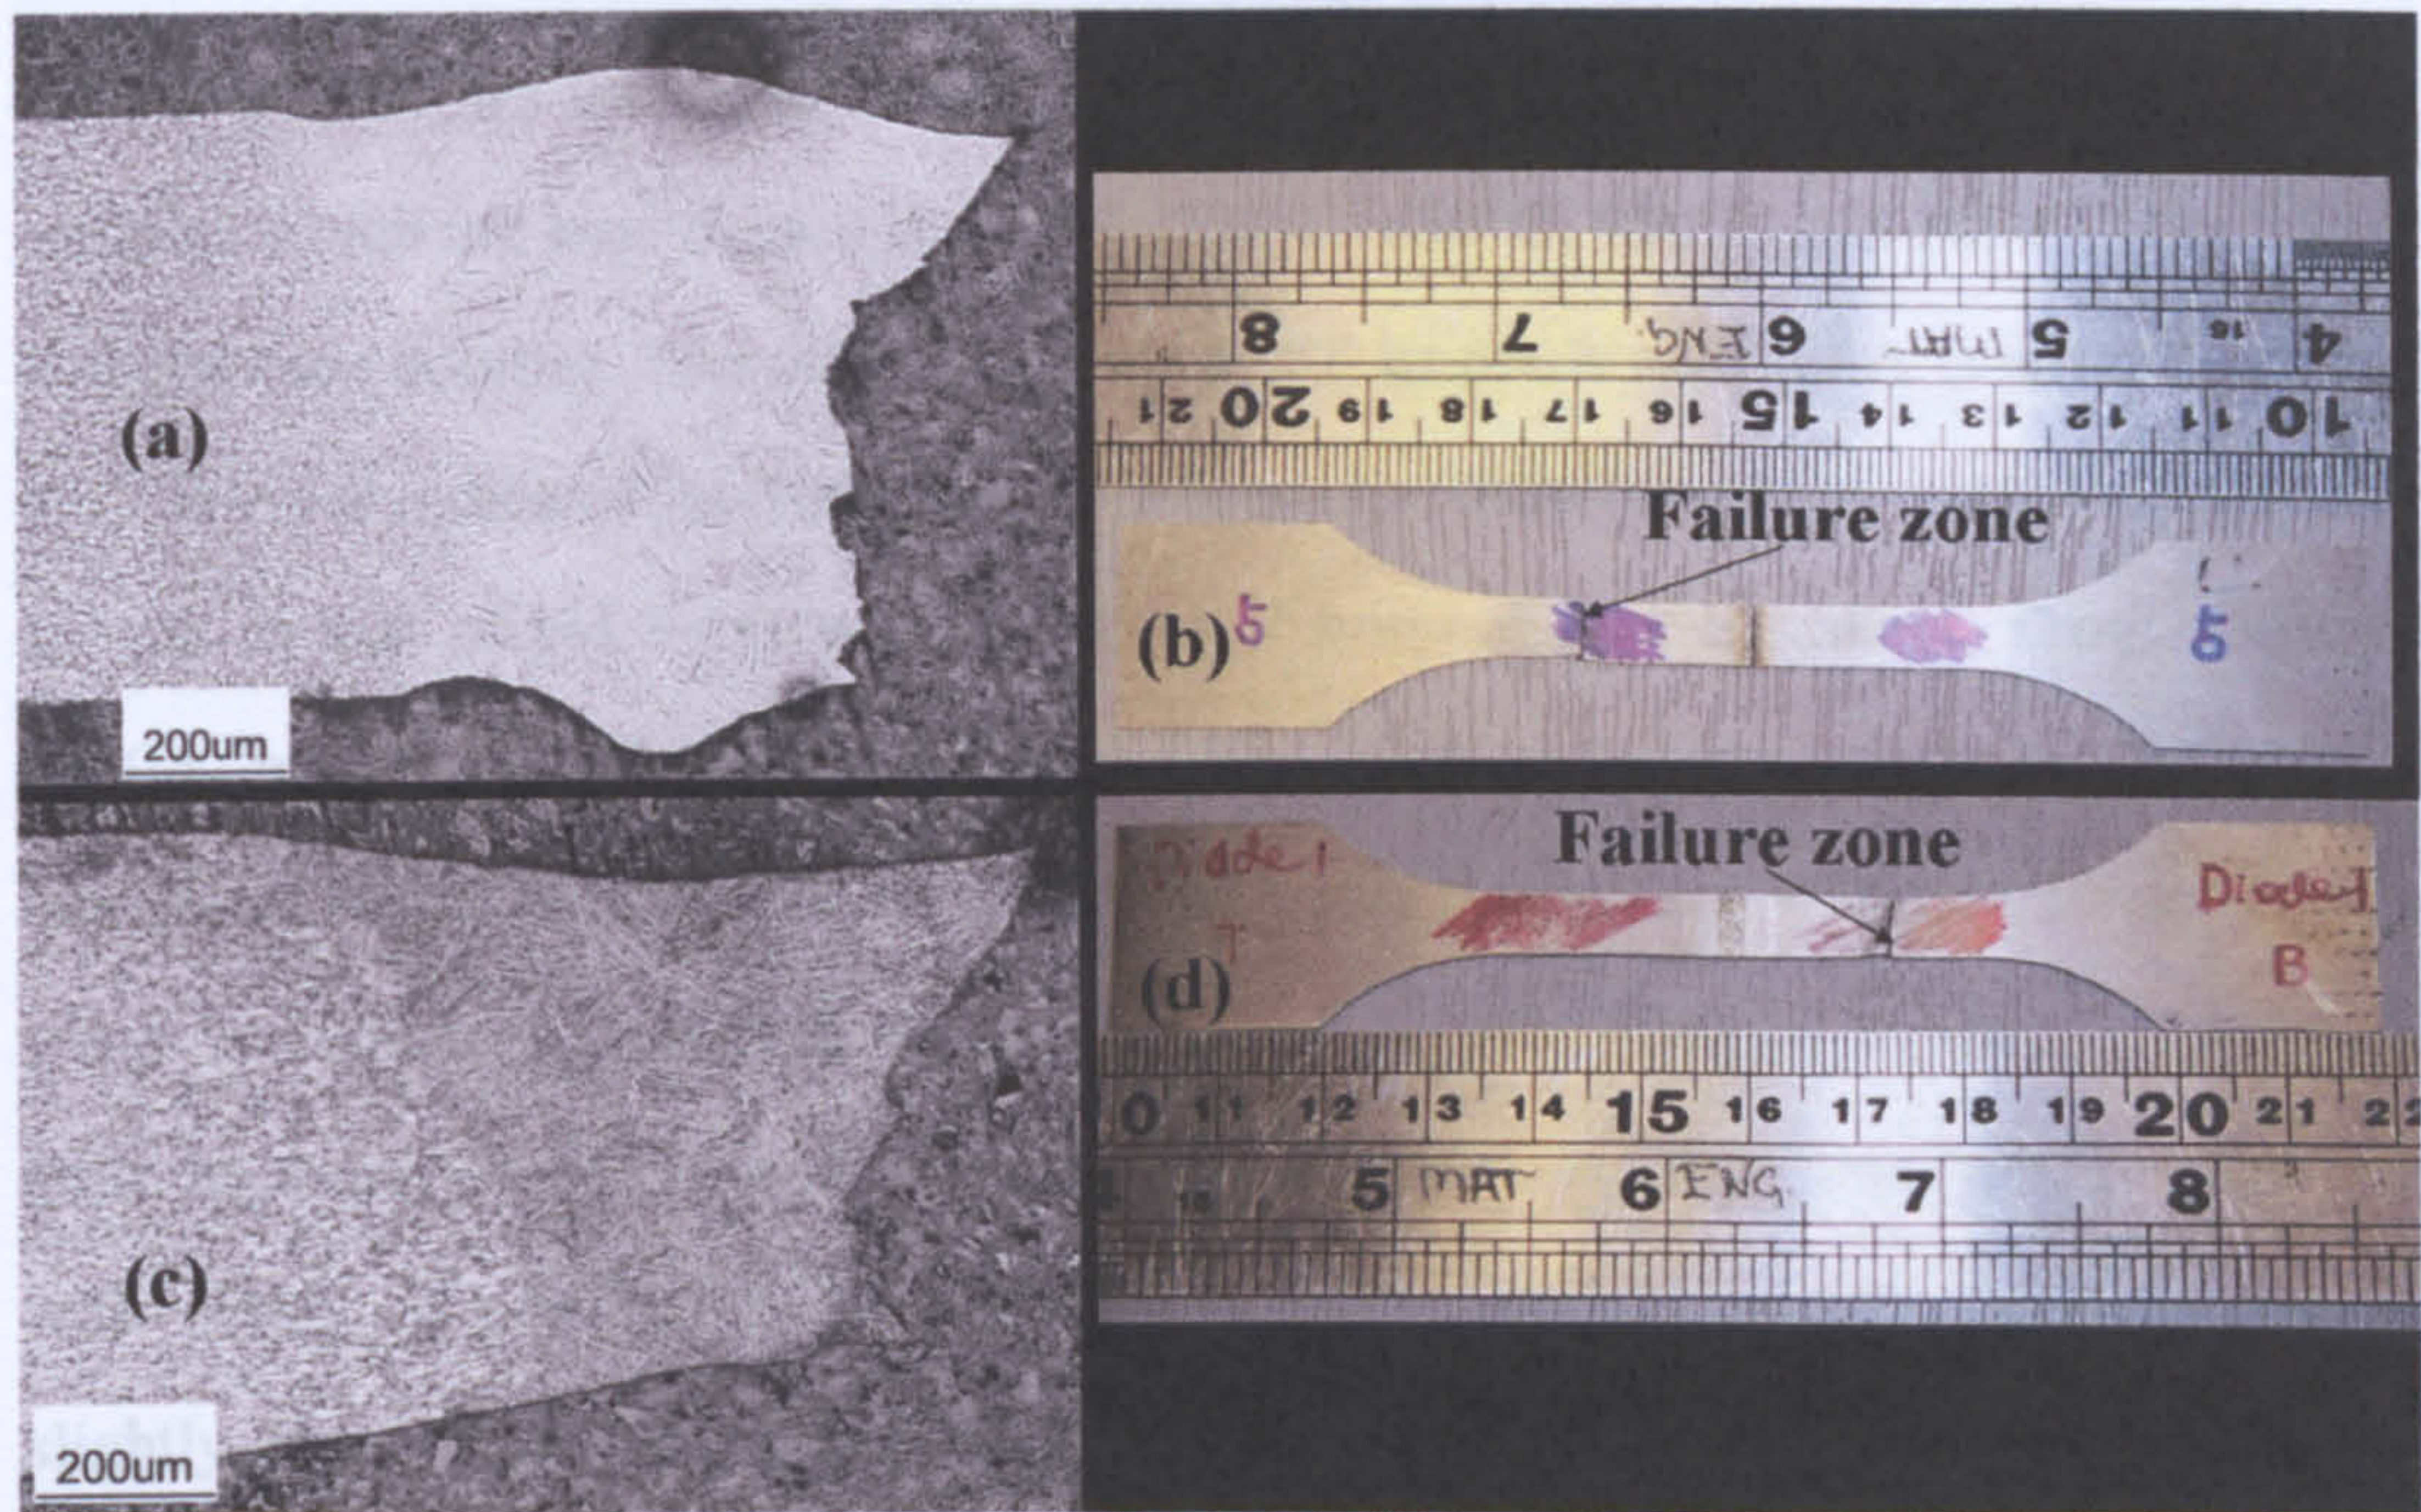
Failure zones of fibre laser welded, Nd:YAG welded and Diode welded Ti6Al4V (a) Fibre laser weld type 1 (b) Fibre laser weld type 2 (c) Nd:YAG weld (d) Diode weld
